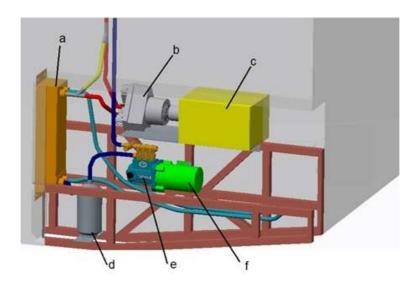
Close up look at the engine bay; a – plate heat exchanger-condenser, b – scroll expander, c – generator, d – buffer tank, e – pump, f – VDS.
